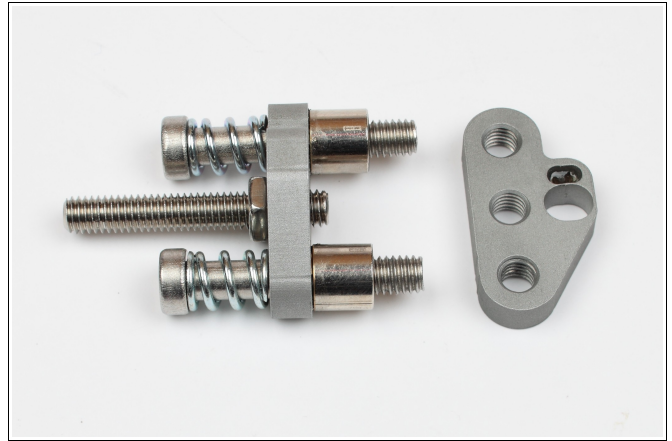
The Hall effect sensor is removed (with hexagonal socket wrench of wrench size 2).
